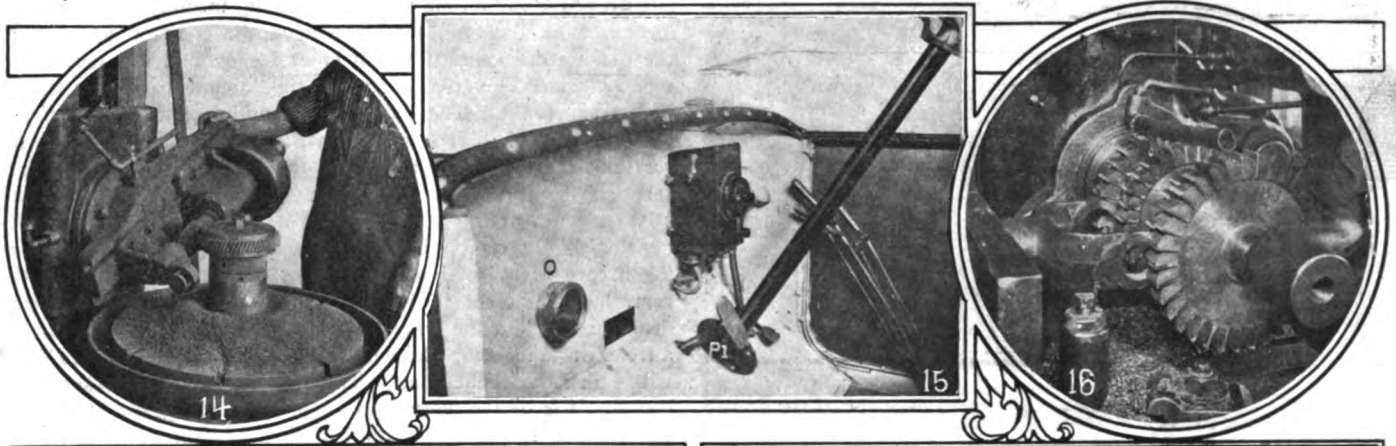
Showing the method employed in Maxwell plant of cutting timing gears
